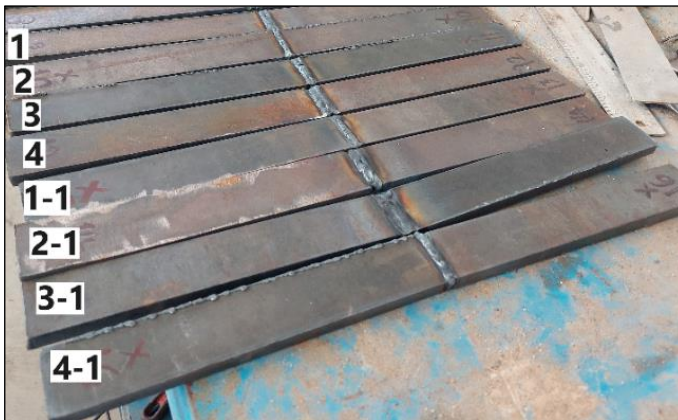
Welding samples welded at settings shown in Table 4
